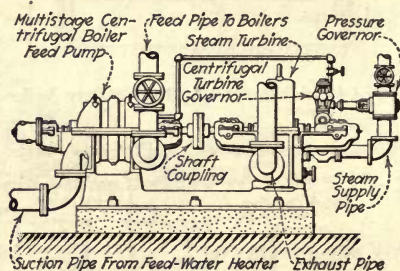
Centrifugal Boiler-Feed Pump Driven By Steam Turbine Through Direct Shaft Connection.
